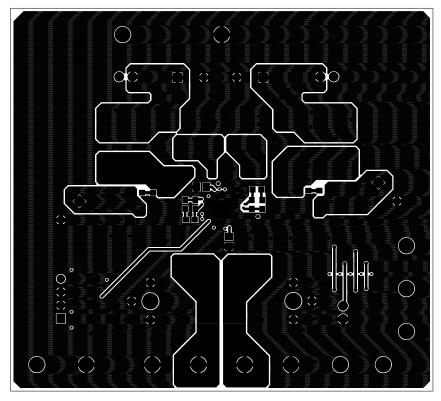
BOTTOM LAYER SOLDER SIDE
